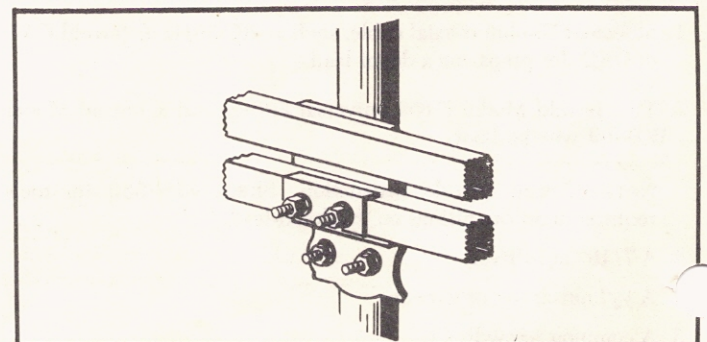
TYPICAL U-BOLT MOUNTING FOR J55-LO & J105-HI
